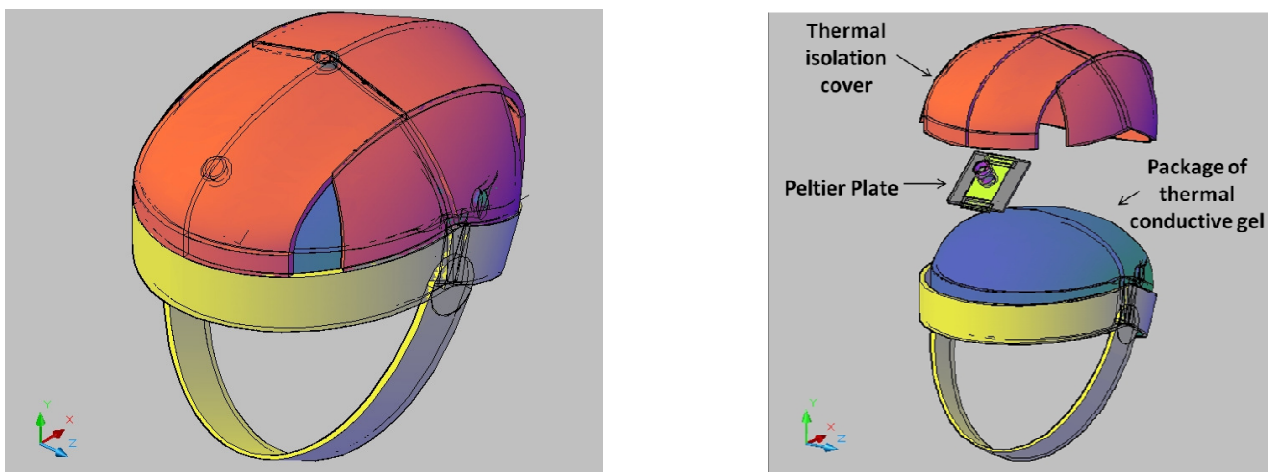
Drawing of cool cap. At left side, an external view and at right side, an exploded view of cool cap.
